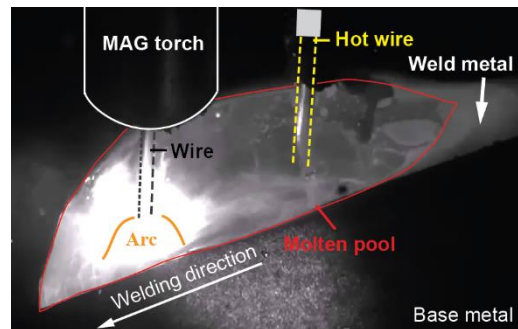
Appearances of weld beads, cross-sections and molten pool images (continued).
